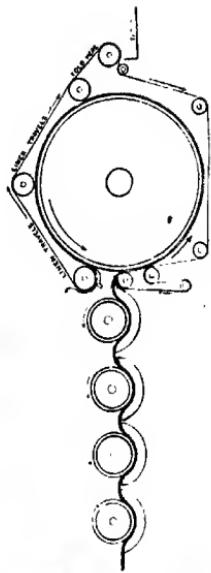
C.—SECTIONAL VIEW OF FIG. 71B,
